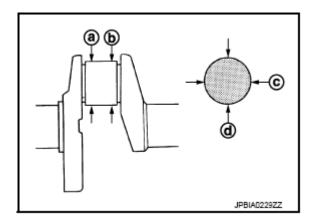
Identifying Crankshaft Out-Of-Round And Taper Measurement Points Courtesy of NISSAN NORTH AMERICA, INC.
